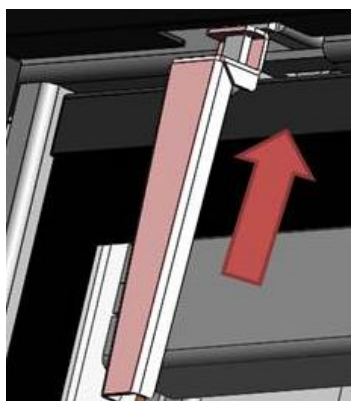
Insert the tool in the catch to open the door to clean the glass
